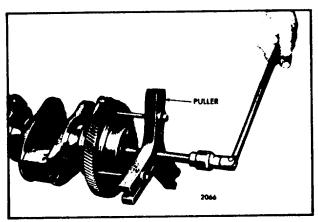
Removing Crankshaft Timing Gear With Puller J 4871
